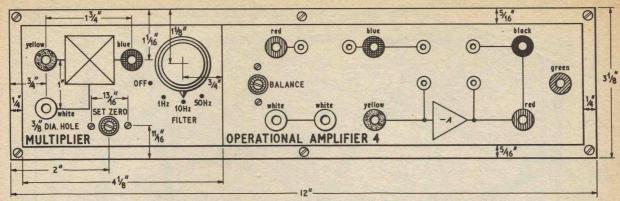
Dimensions and engraving details for UNIT "D" front panel
